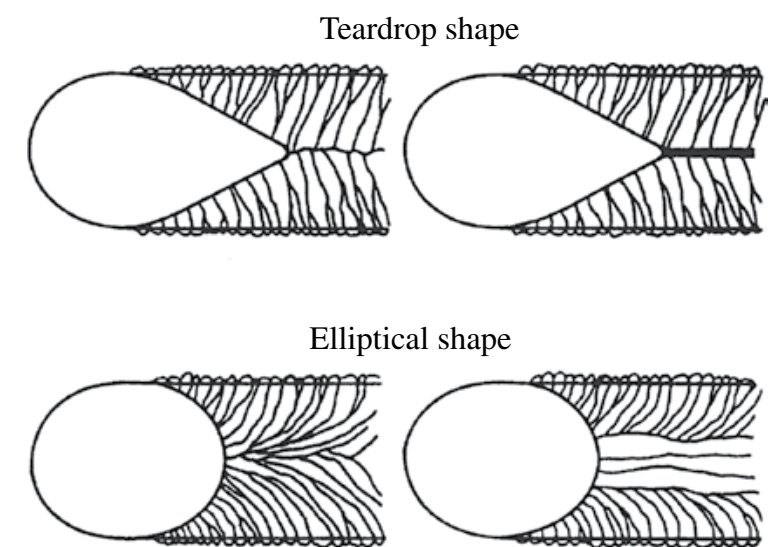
Illustration of the elliptical and teardrop-shaped weld pools (From Ref. [18]. © Wiley).
